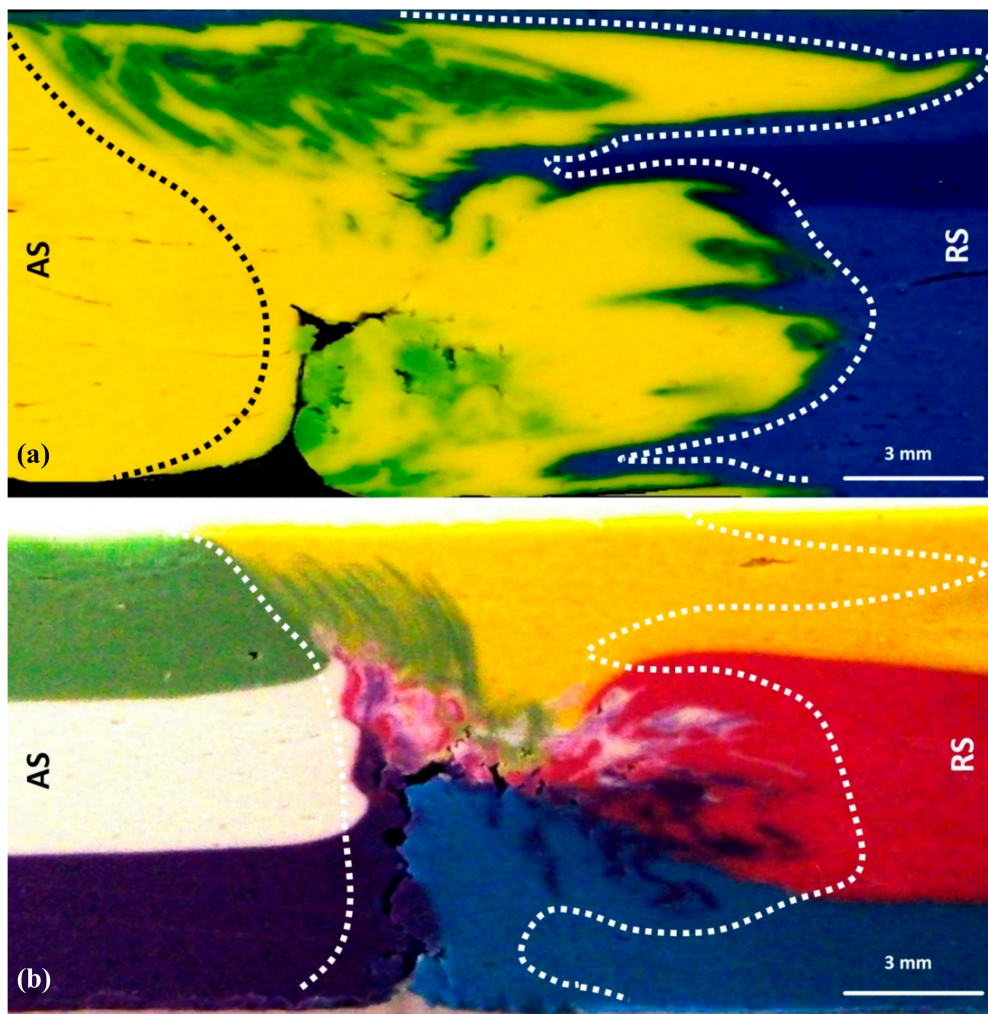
Swirling pattern at the mid-thickness cross-section of the weld, the juggled intermixing at the mid-stirring zone, representative of the shear layers around the pin, situated between top and bottom shoulders; (a) aluminium sample (1000 rpm, 300 mm/min), and (b) bi-colour plasticine analogue (90 rpm, 40 mm/min).
